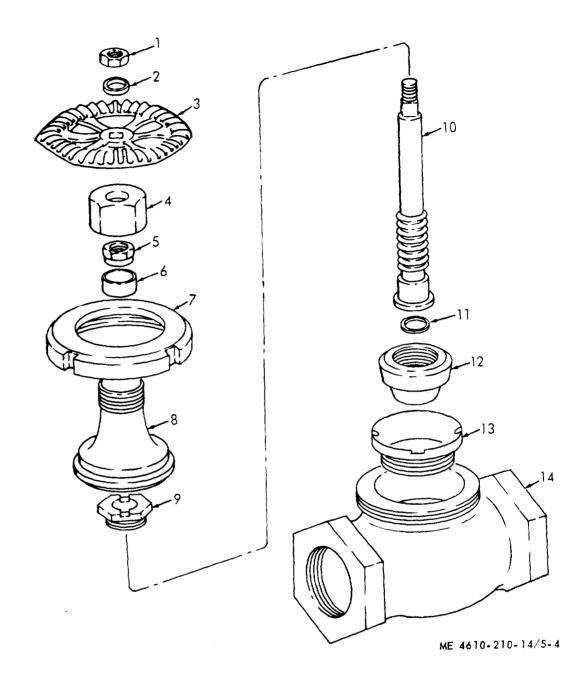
Range adjusting valve, diassembly and reassembly.
